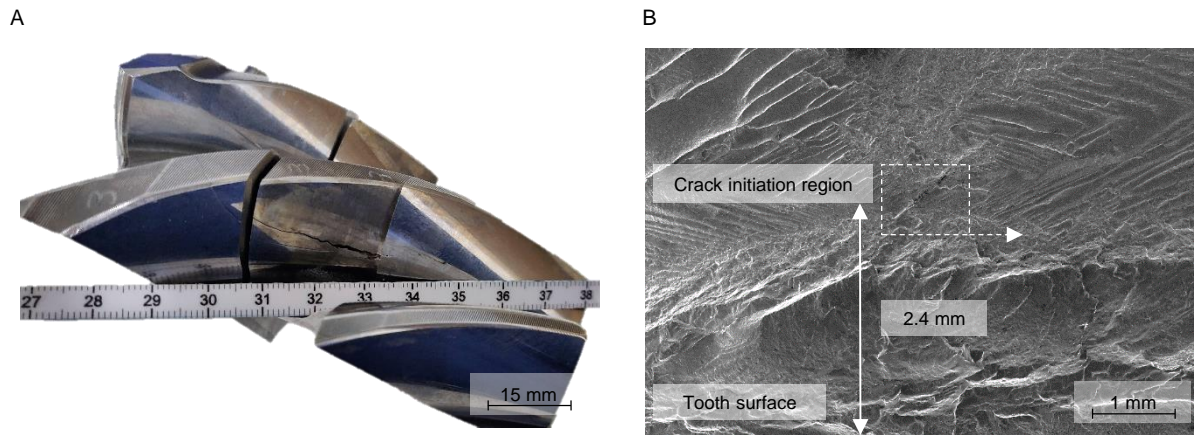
TFF on pinion B1-3 with crack location and fracture surface extraction in (A) and SEM analysis showing a 1.4 mm long MgO-Al₂O₃ spinel in the crack initiation site
